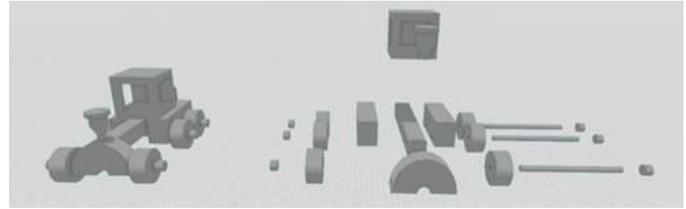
An example of a toy truck in the assembled view (left) and in the exploded view (right).
